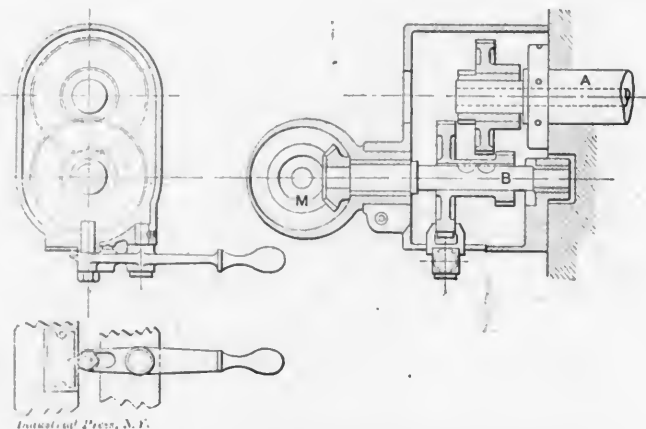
SECTIONAL VIEWS OF UPPER TWO-SPEED MECHANISM.
